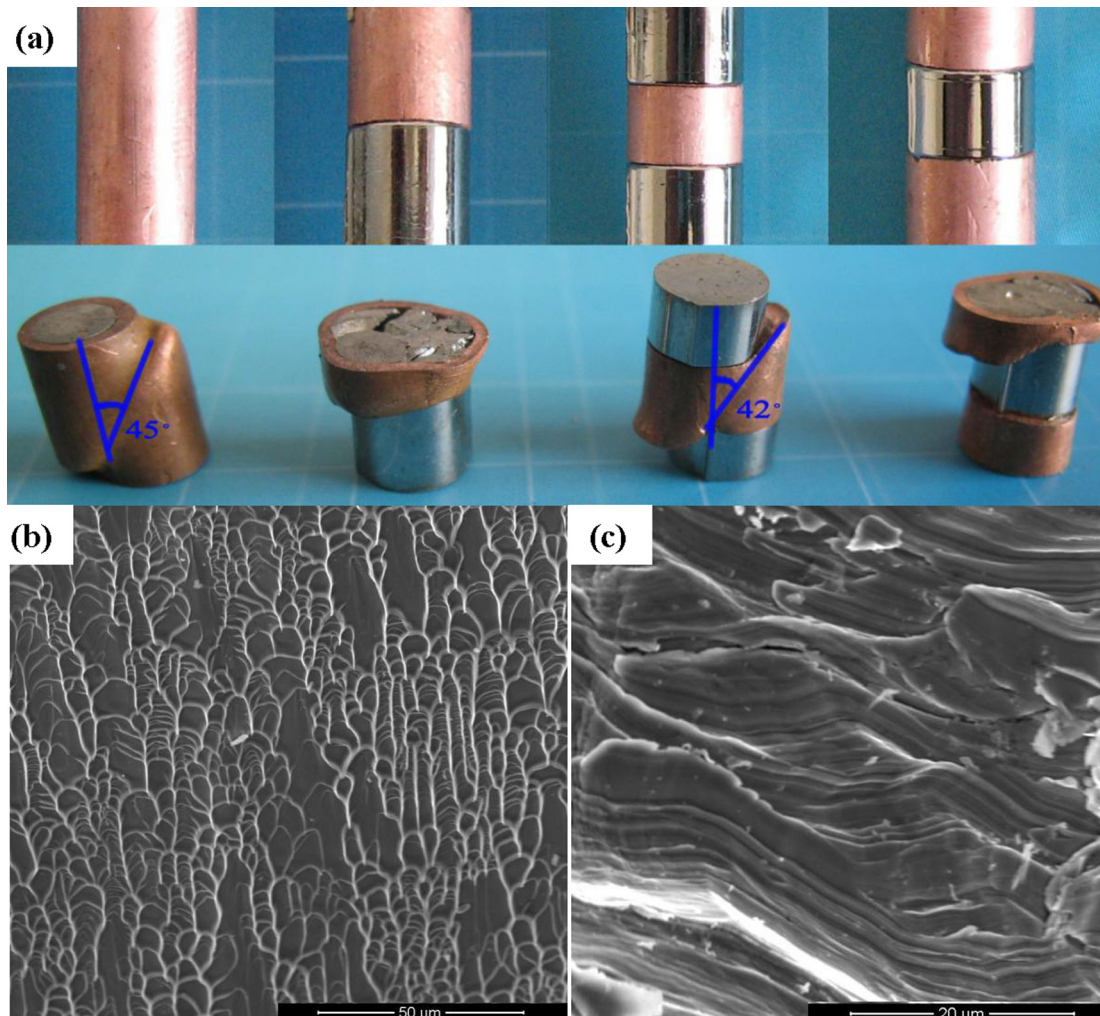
(a) Digital images of the fractured sample; SEM images of (b) veinlike pattern on the fracture surface and (c) shear bands near the fracture surface of Specimen D after shear fracture.
